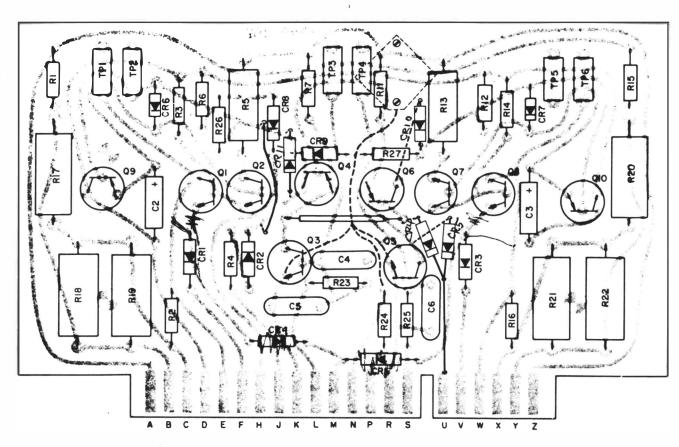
Inductor Assembly 1A2L1, Component Locations
